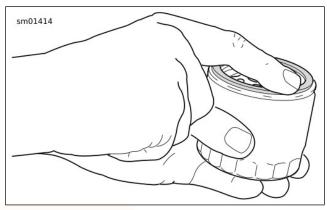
Lubricating New Oil Filter Gasket OIL COOLER
